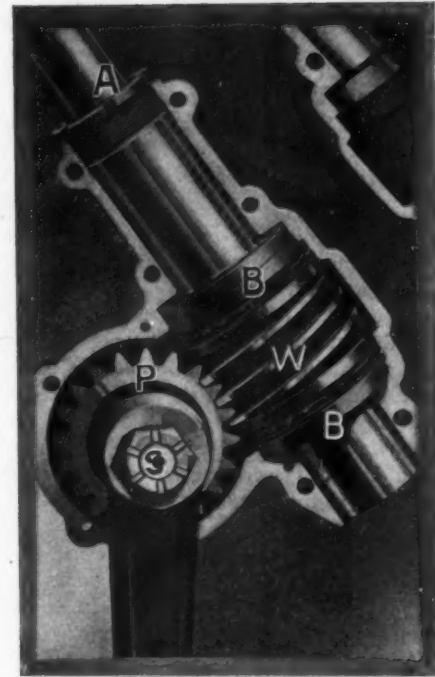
Working parts of the worm and pinion type of steering showing end ball thrusts and drop arm attached to the shaft by keys
